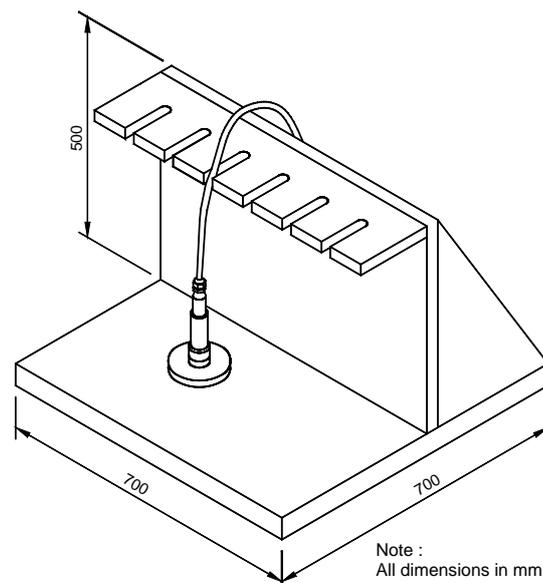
cable jointing fixture (all dimensions in mm)
